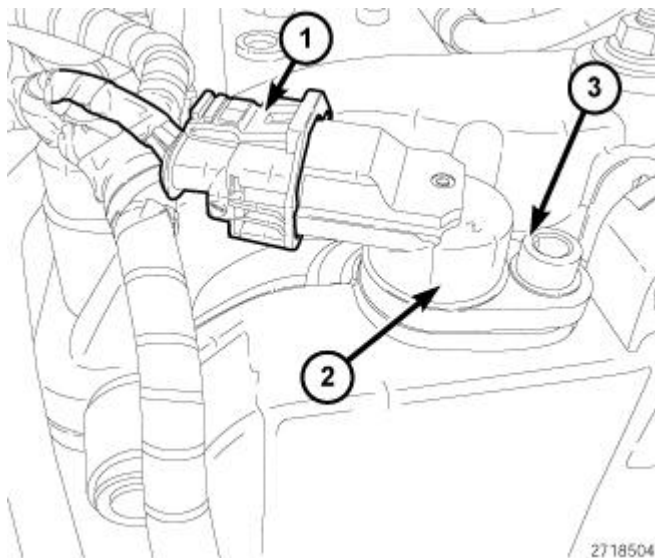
CAMSHAFT POSITION SENSOR HARNESS CONNECTOR
